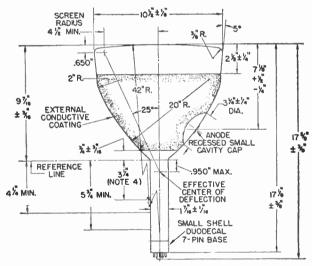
Outline dimensions of a 10BP4 direct view picture tube.
